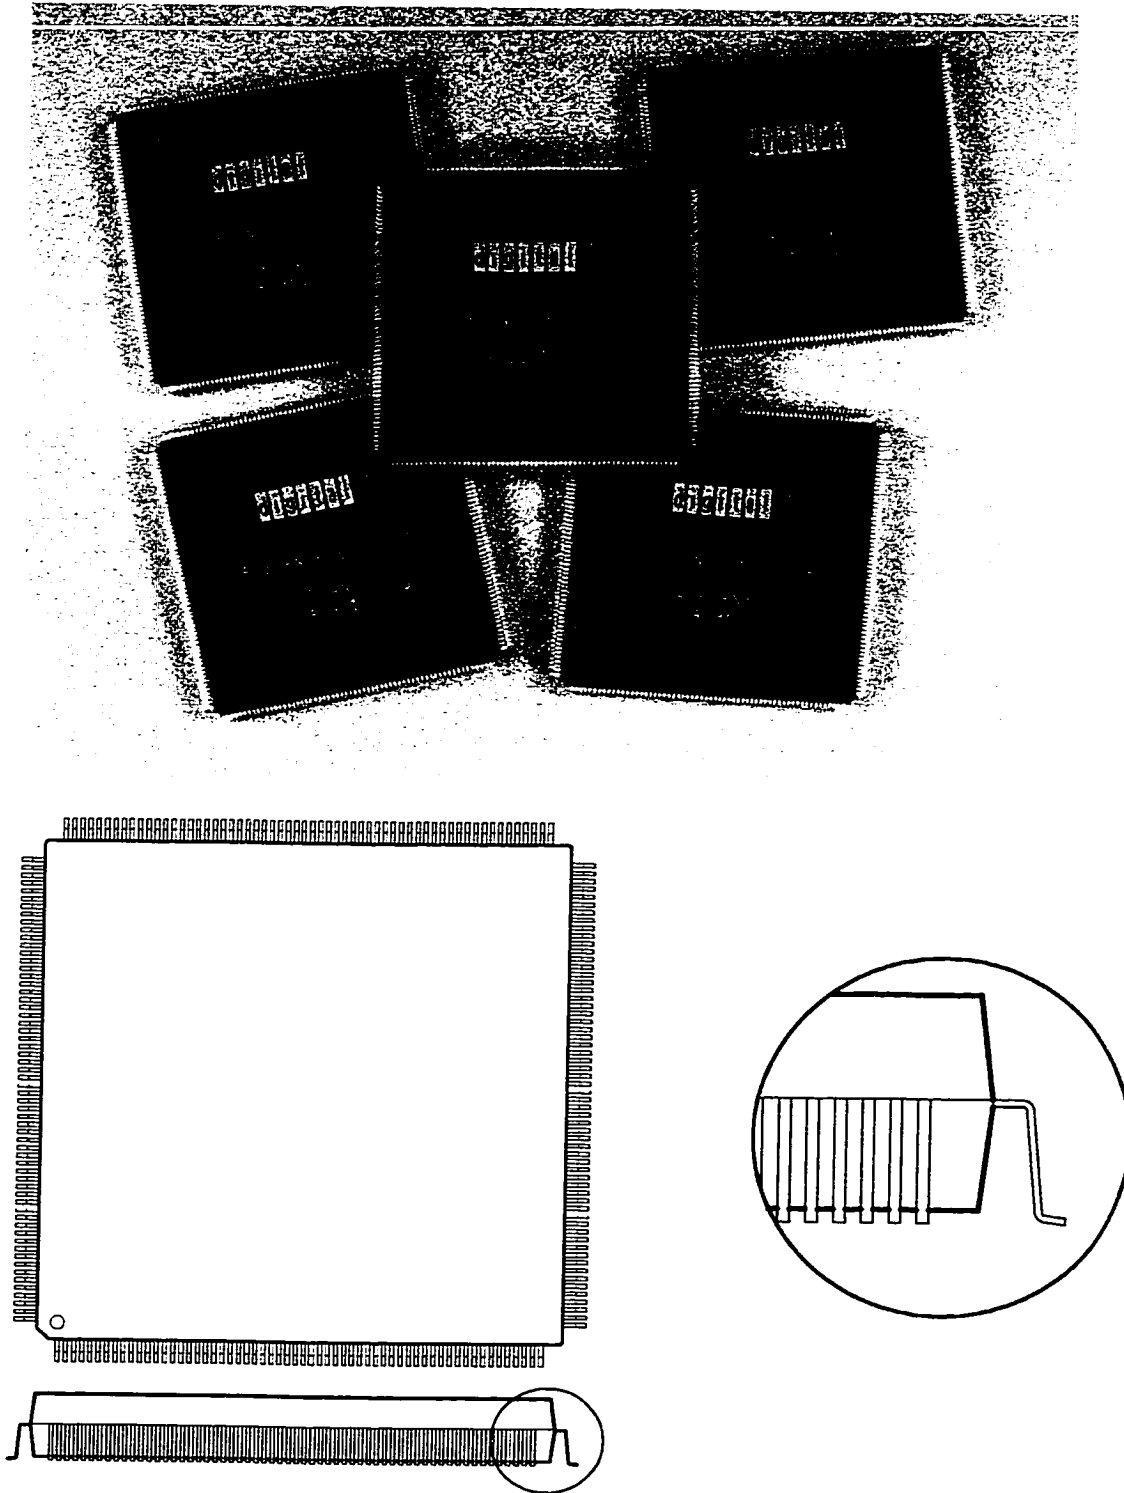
Schematic of Packaged Die (240 Pin QFP)
